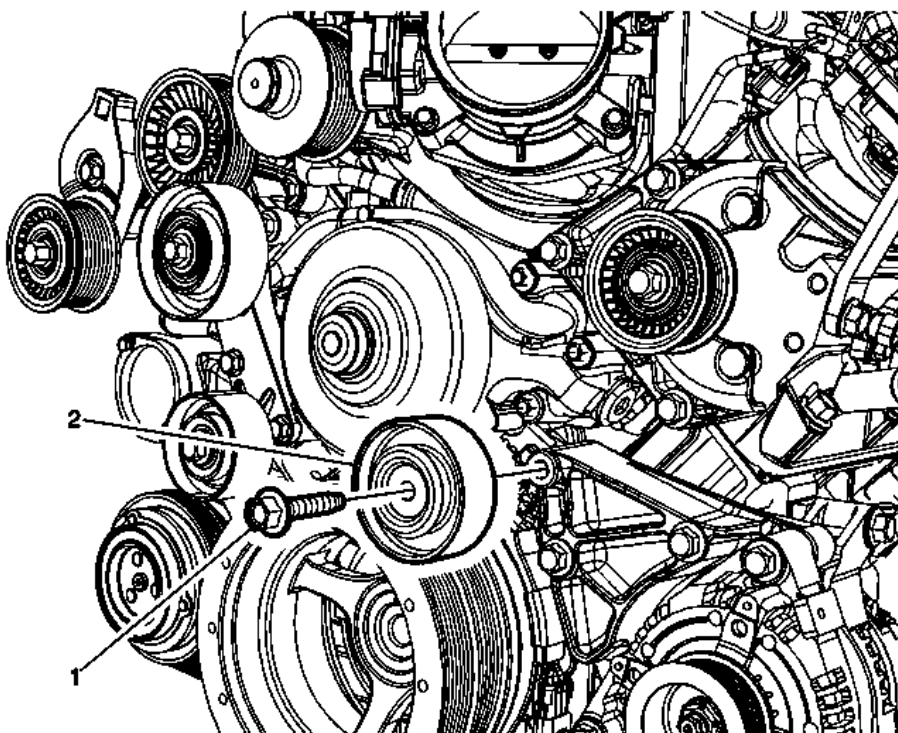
Drive Belt Idler Pulley & Fastener (LSA Lower)
